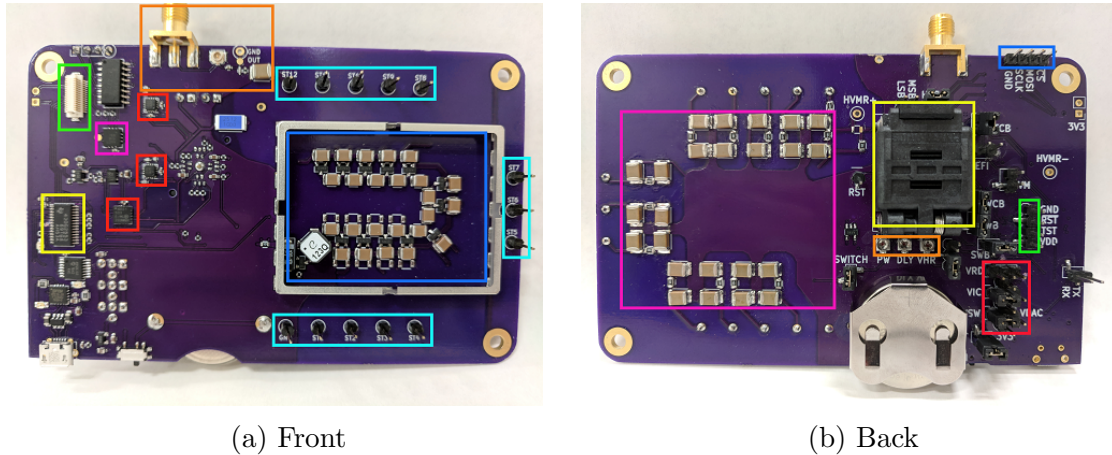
Test PCB for testing switching controller operation and power supply performance.
